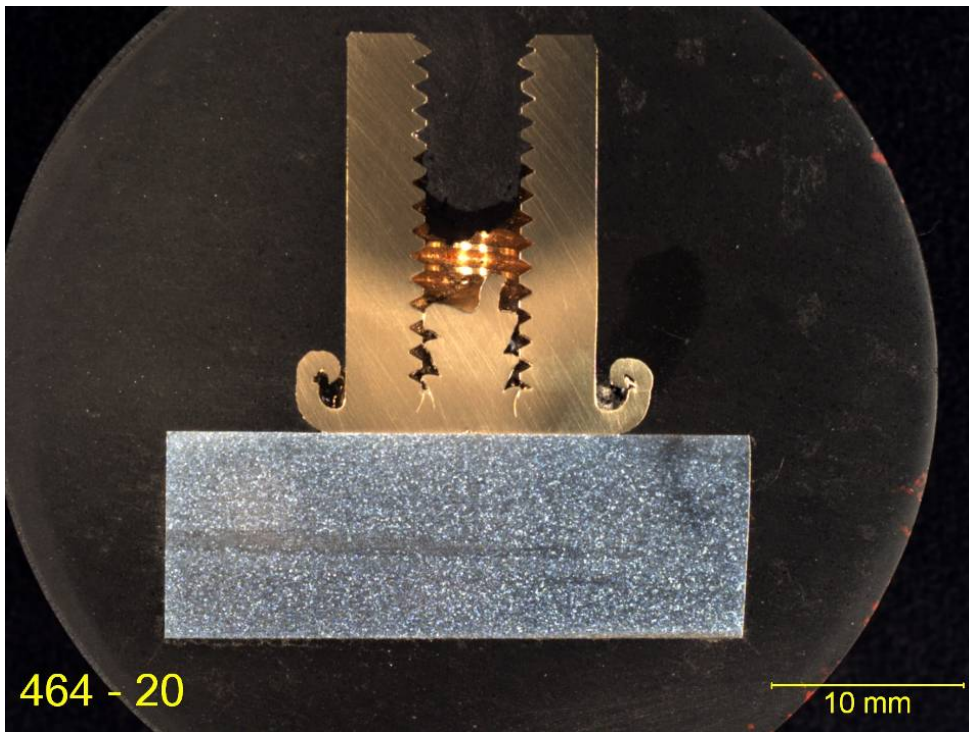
Macro View of Weld 20 in C464 Showing Martensite-Free Joint
